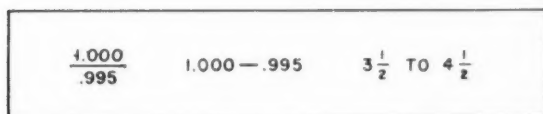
When limits are expressed in drawing notes, they may be written in any of the forms shown.
